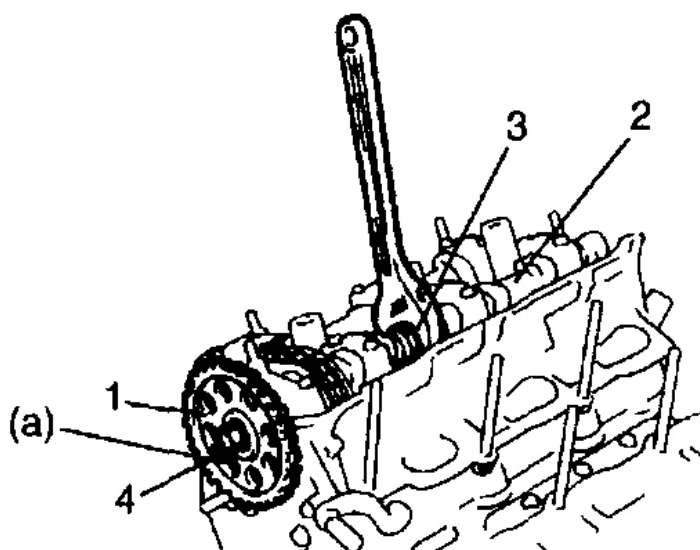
Checking Timing Mark On RH Bank Intake Camshaft
